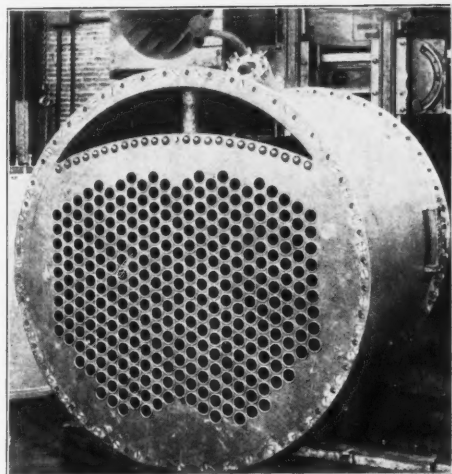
Calandria Used in the Wurster & Sanger Evaporator
